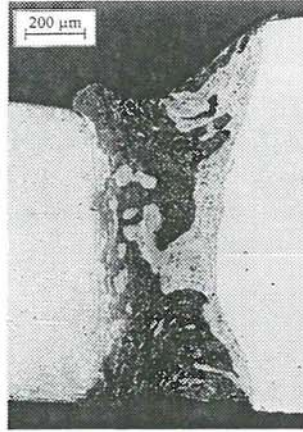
(a). Weld cross sections and hardness profile using helium as shielding gas.
